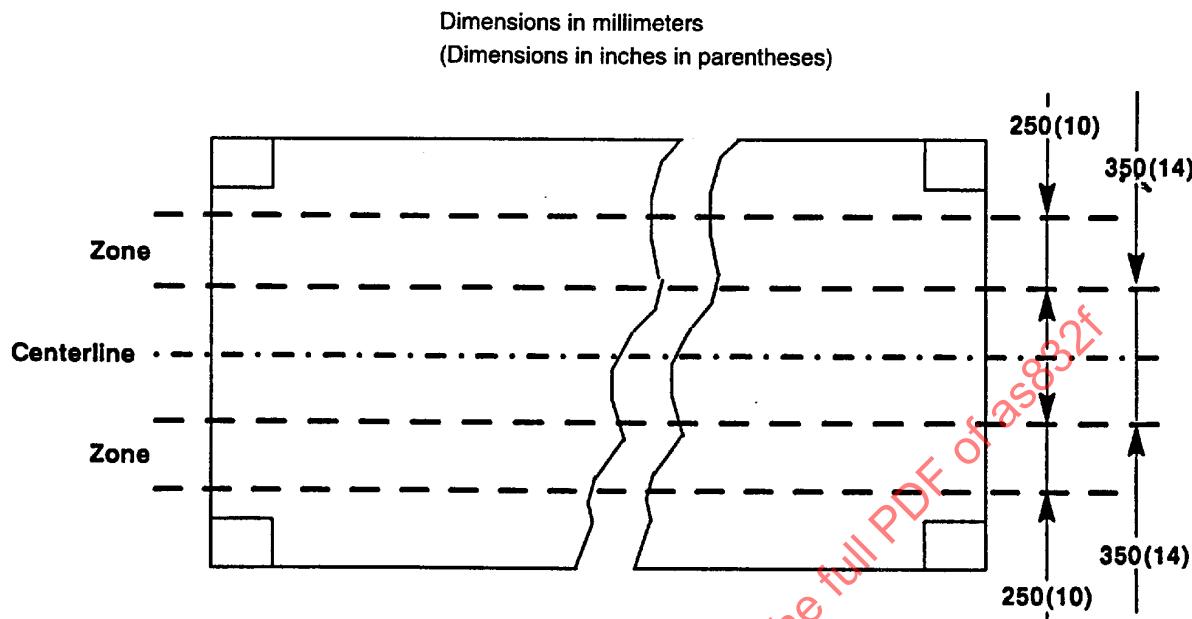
Details of Requirements for Load-Transferring Areas in Base Structures of Containers
